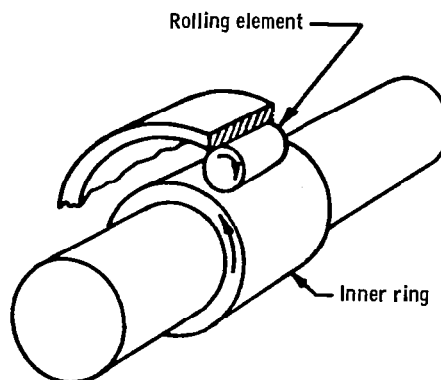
Nonconformal surfaces as shown in a rolling-element bearing.
